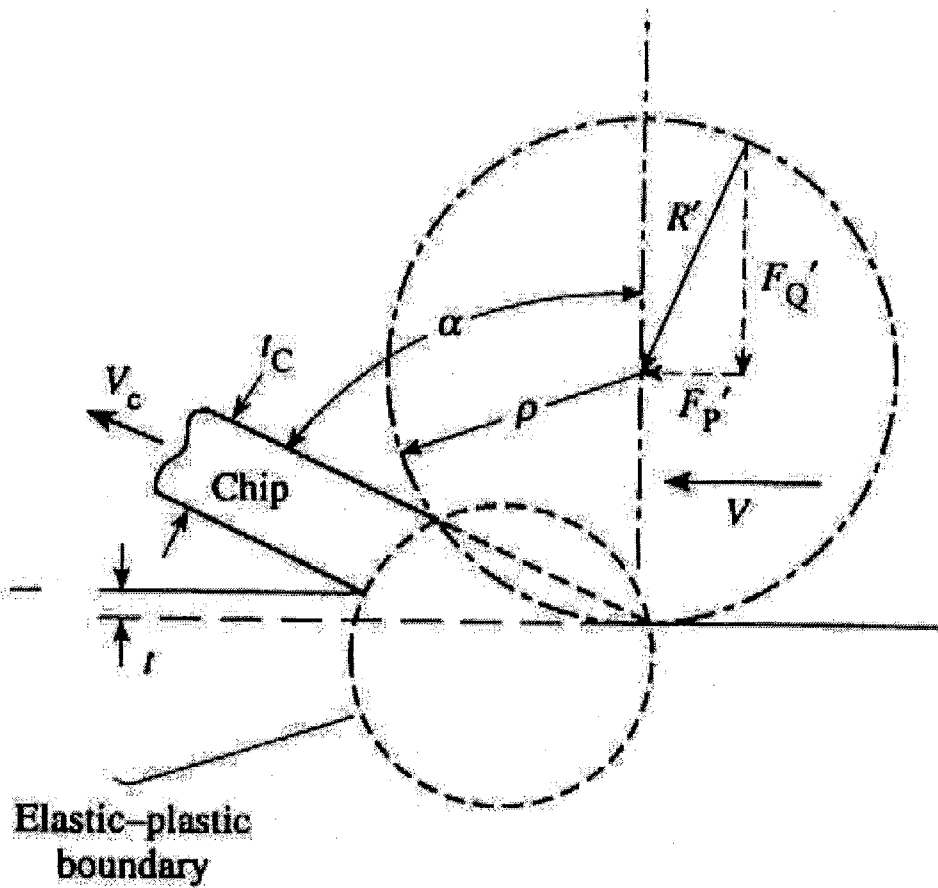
Mechanism of material removal involving extrusion of heavily deformed material ahead of a large radius tool in grinding of ductile Metals (Shaw, 1972, 1996)
